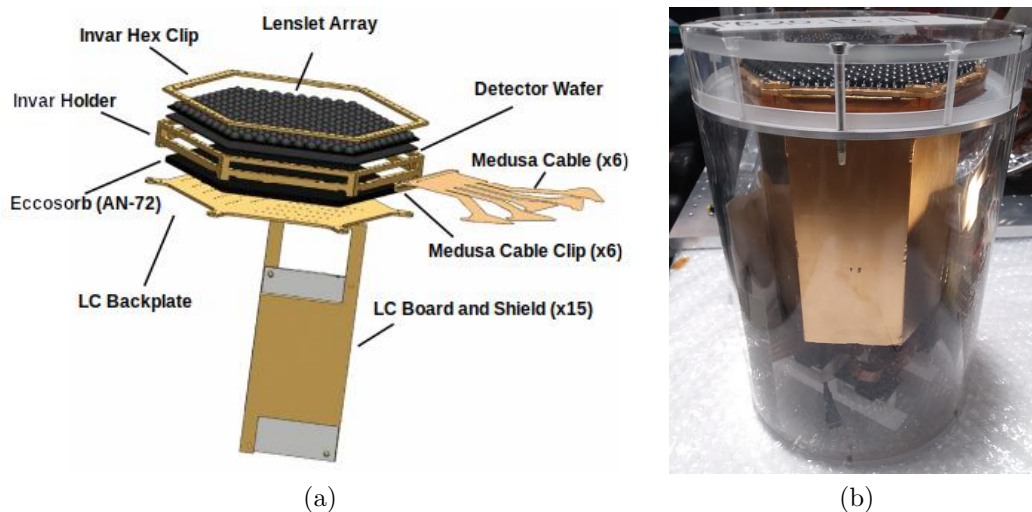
Exploded CAD model (a) and image (b) of a Simons Array detector module inside a plastic container commonly used for shipping and handling. The CAD model does not include the radiation shield around the LC boards, which is the gold-plated hexagonal can in the picture.
